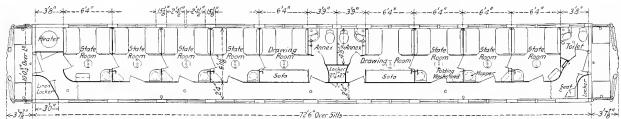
Floor Plan of Chicago, Milwaukee & St. Paul Compartment Sleeping Car. Builder, The Barney & Smith Car Company.
